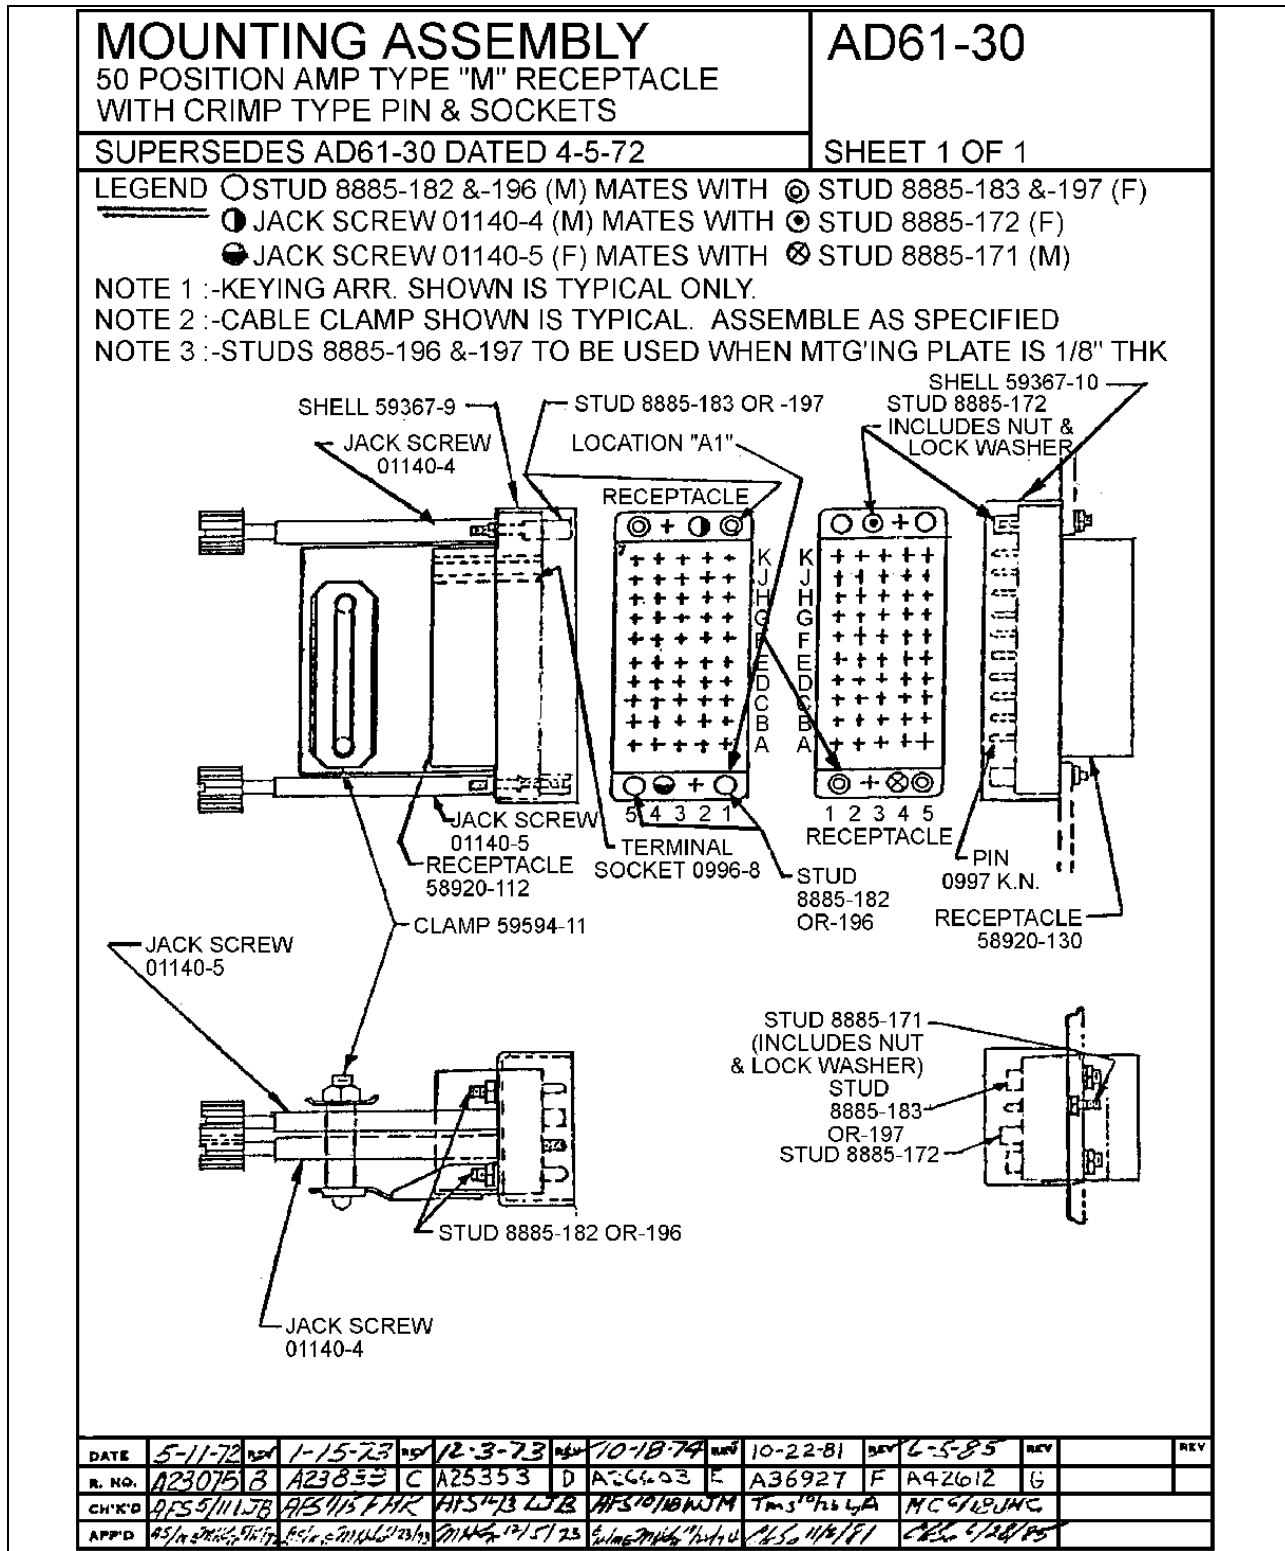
Connector, Plug, 50-Way and 75-Way, Mounting Assembly, AD61-30
